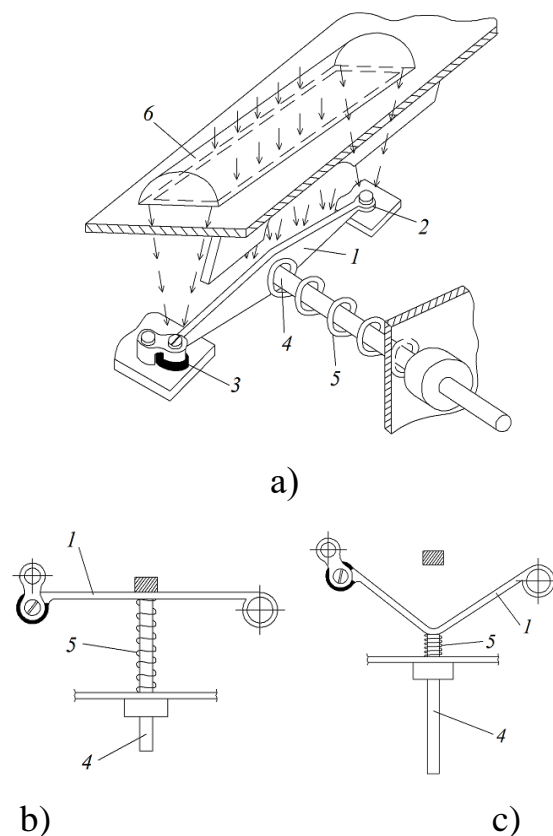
Nut-indicator for overheating of the sectional casing of the technological machine in an assembled state
